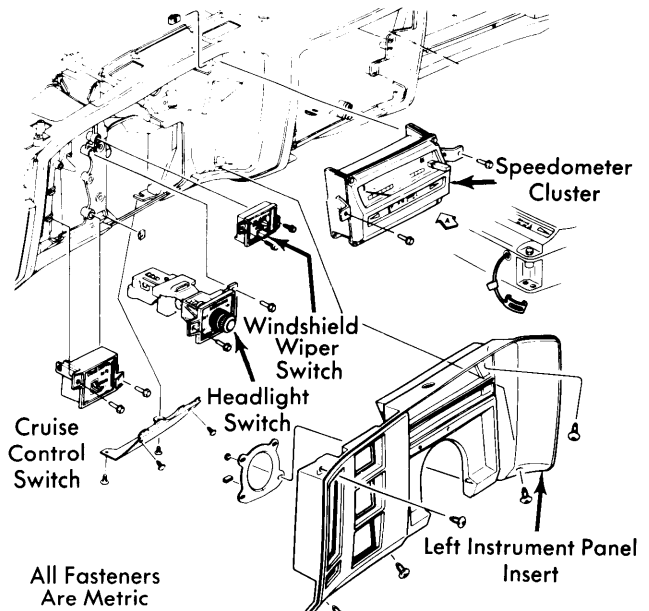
Cadillac Speedometer Cluster (Exc. Eldorado & Seville)
